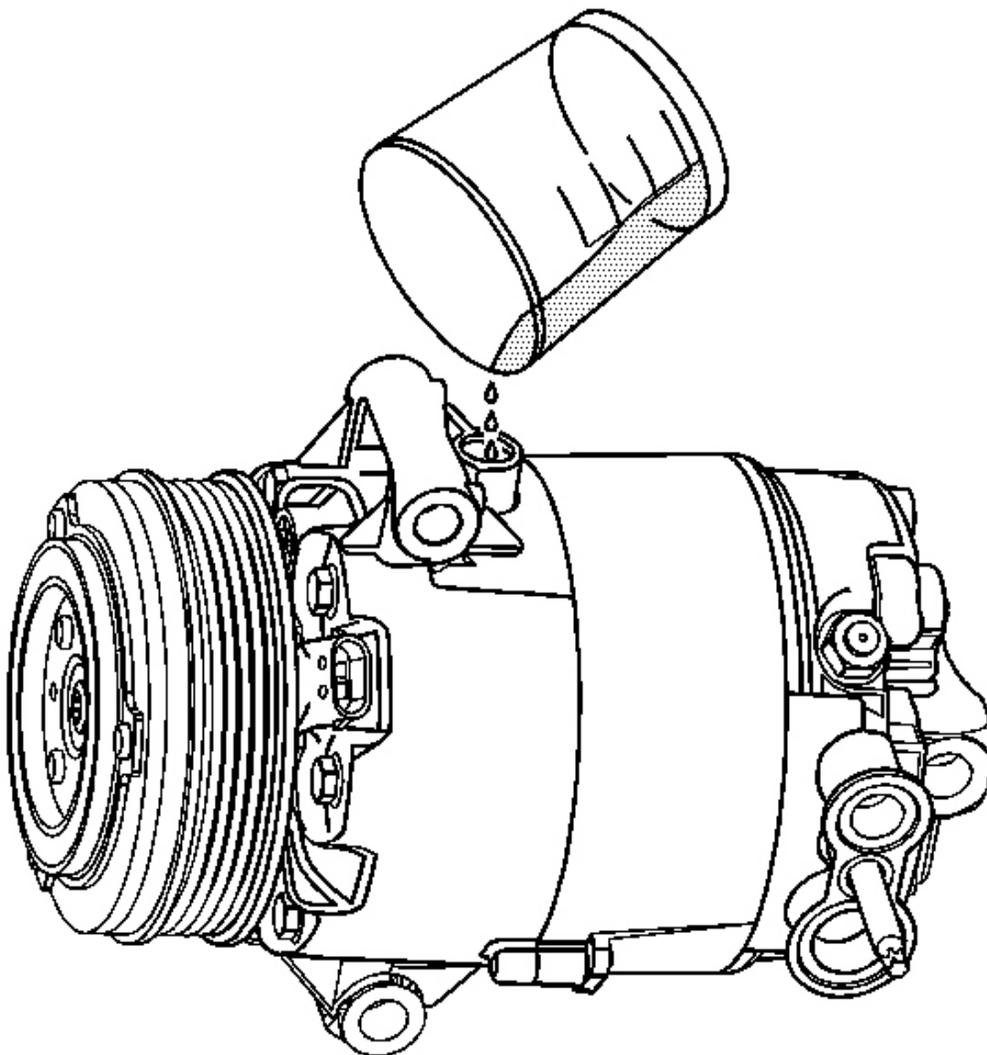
Balancing Refrigerant Oil During Compressor Replacement
